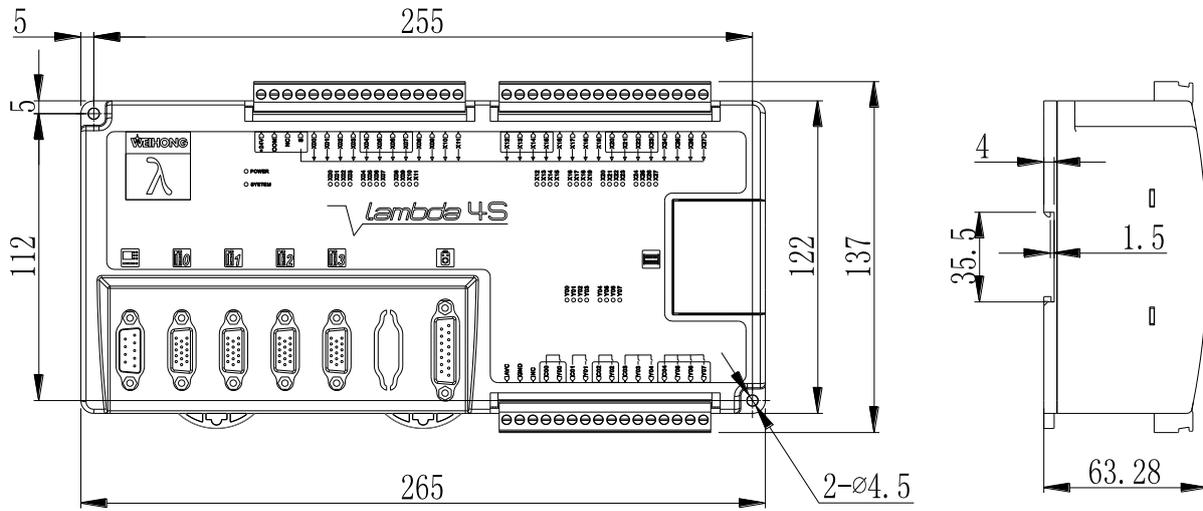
Dimension Drawing for Lambda 4S Controller
